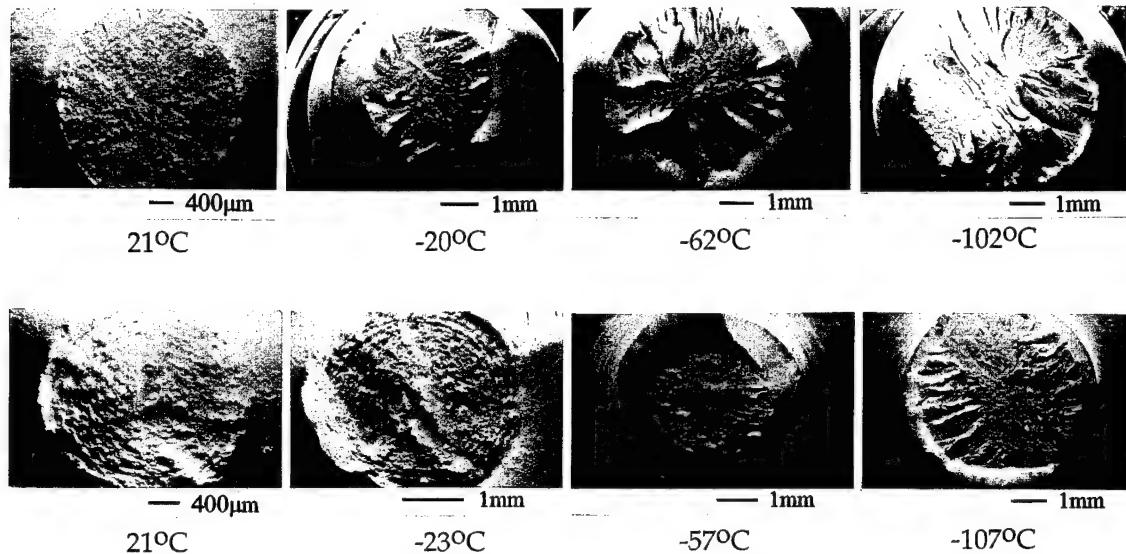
Fracture appearance of BIS 812 EMA weld metal tensile specimens, plain (upper) and notched (lower).
